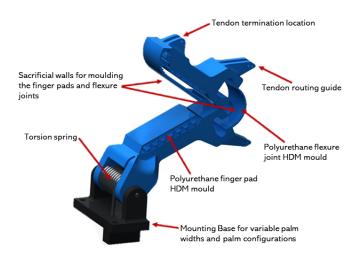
The structure of a passive-closing adaptive finger before moulding. The finger is tendon driven and it has a spring loaded pin joint and a flexure joint. The flexure joint and the finger pads are based on polyurethane elastomer material (Smooth On – PMC 780 and Vytaflex 30), which is poured in between the sacrificial mould walls using the concept of Hybrid Deposition Manufacturing (HDM) [21].
